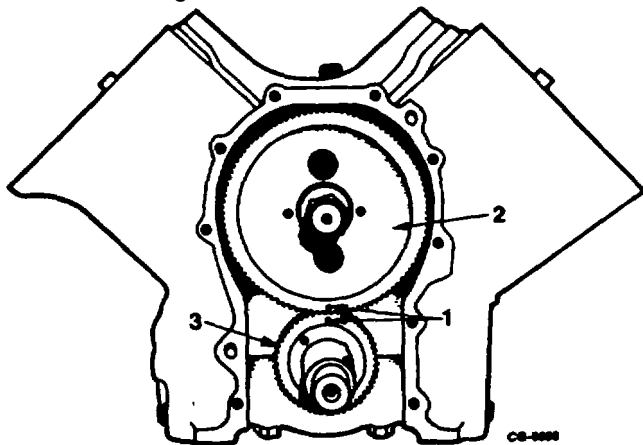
Aligning Timing Marks on Camshaft and Crankshaft Gears
